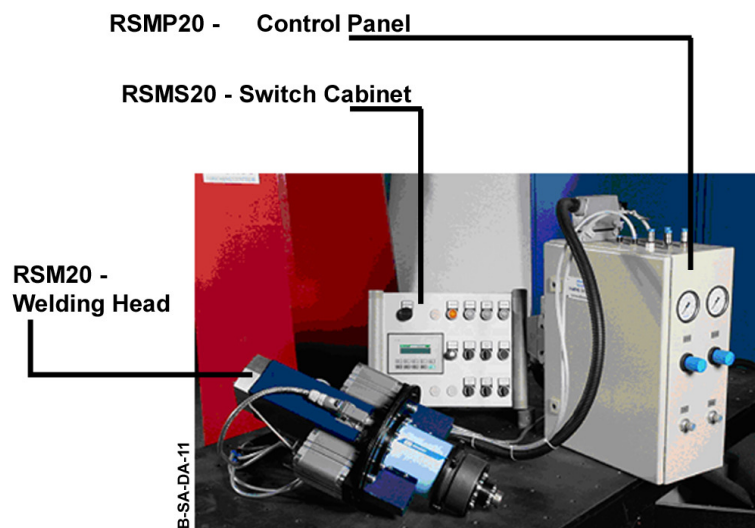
RSM 200 friction welding machine used for friction riveting.
